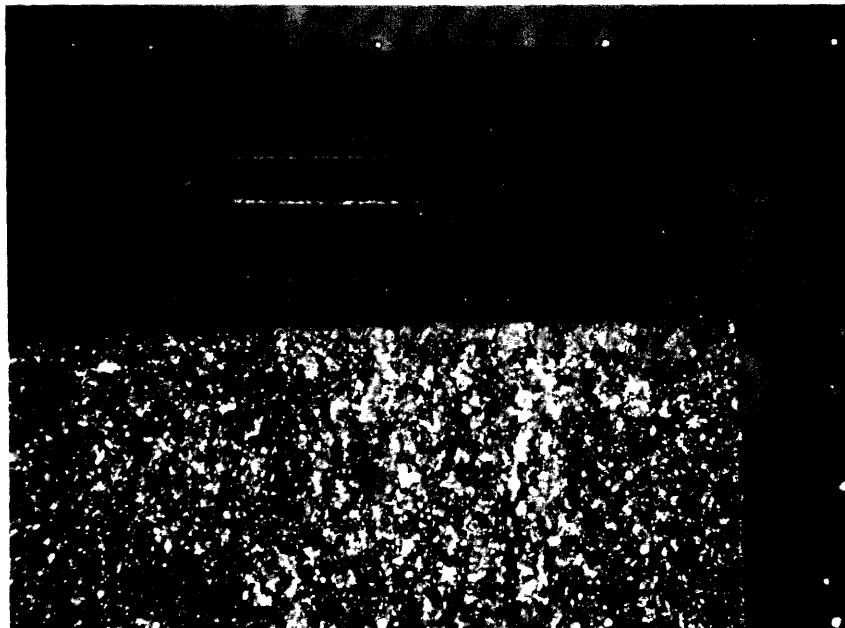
Fracture surface of fatigue sample E at 4.25x. The crack growth direction is from left to right. Visible are the crack front at test end prior to fast fracture at cryogenic temperatures.
